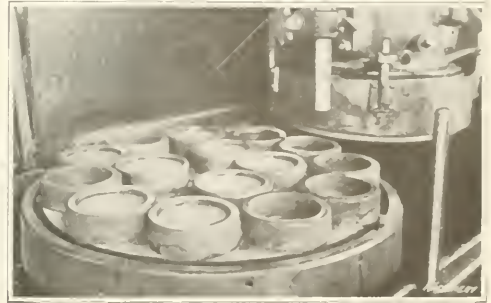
Method of holding and grinding roller bearing race rings on a Blanchard vertical surface grinder
